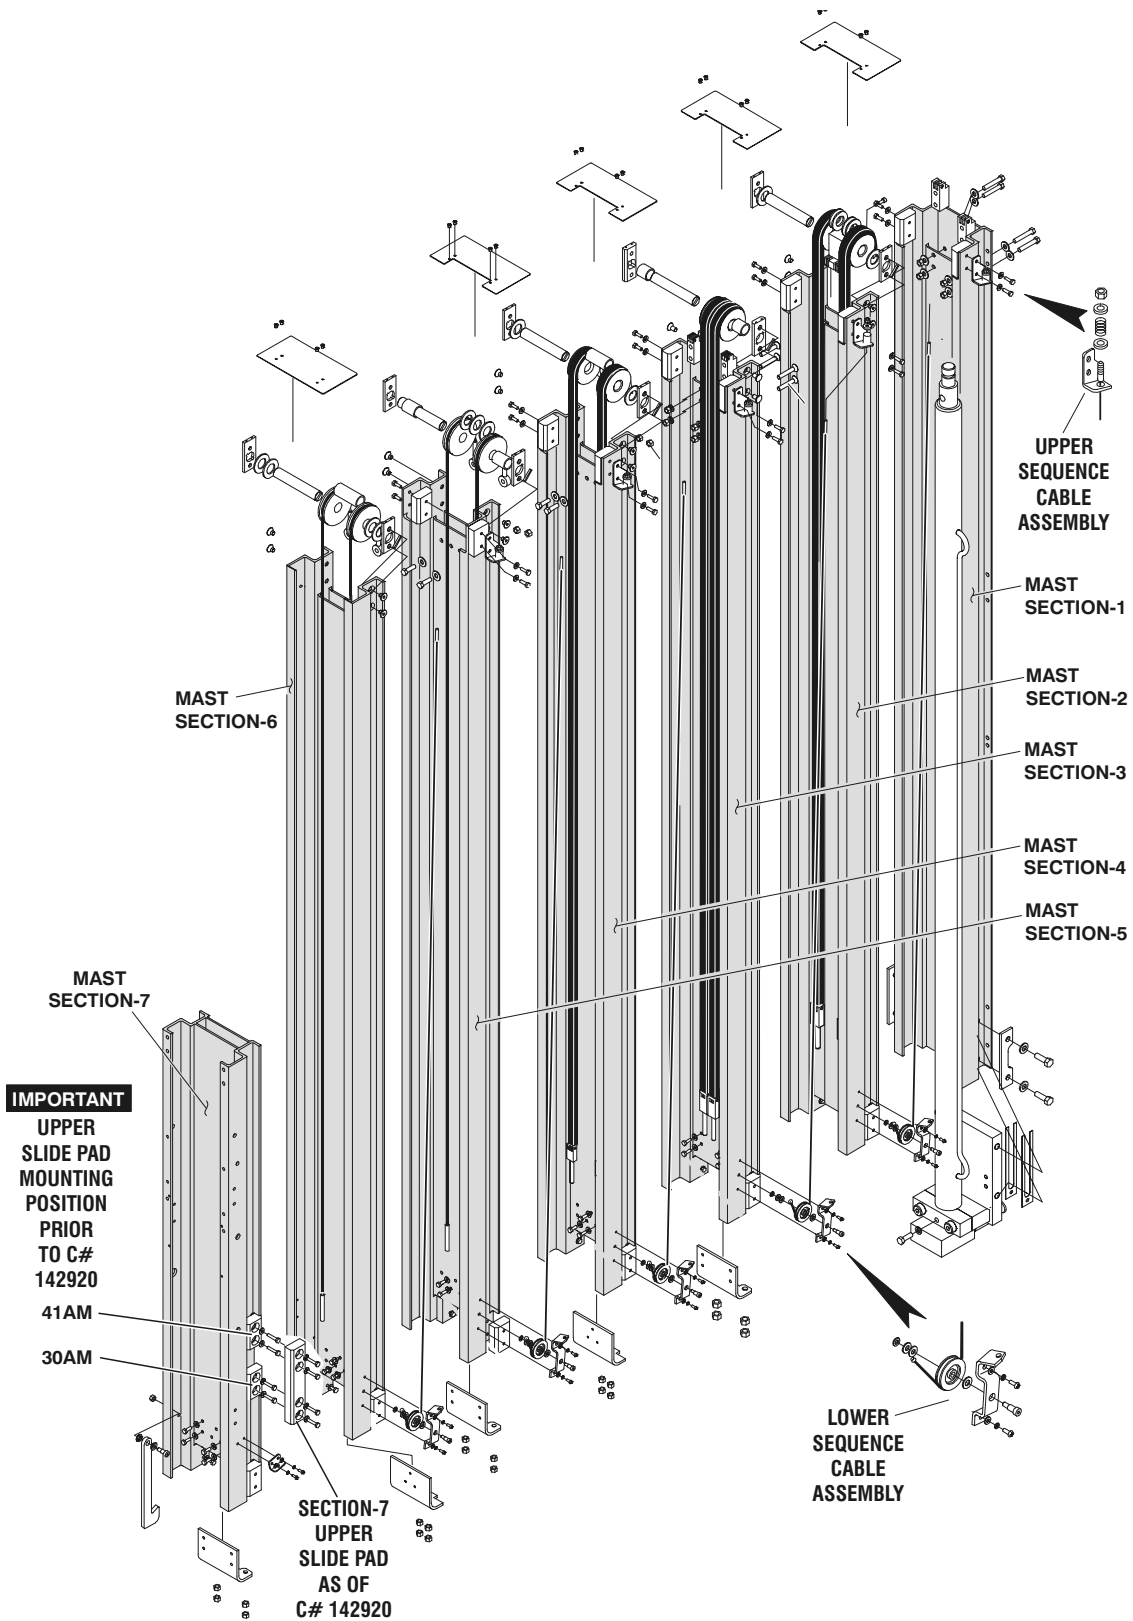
30EL & 41EL Mast Assembly Components. (7 - Section)
